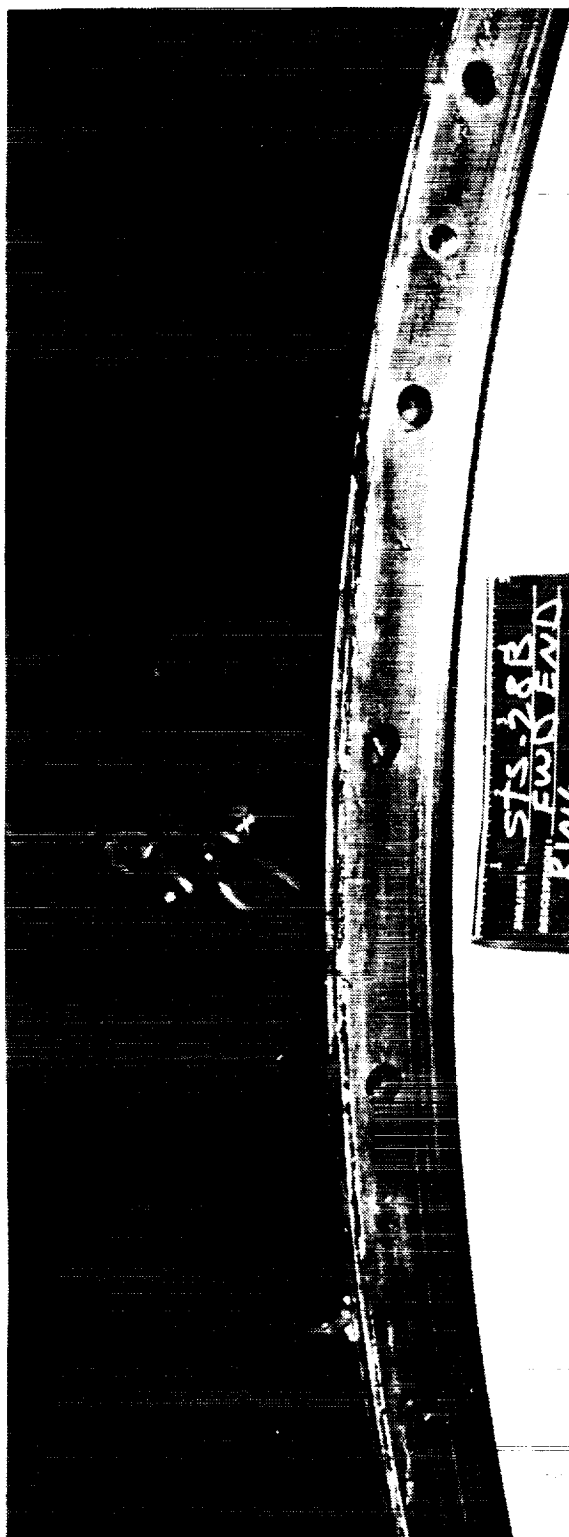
STS-28B Bearing Forward End Ring (0 deg)
